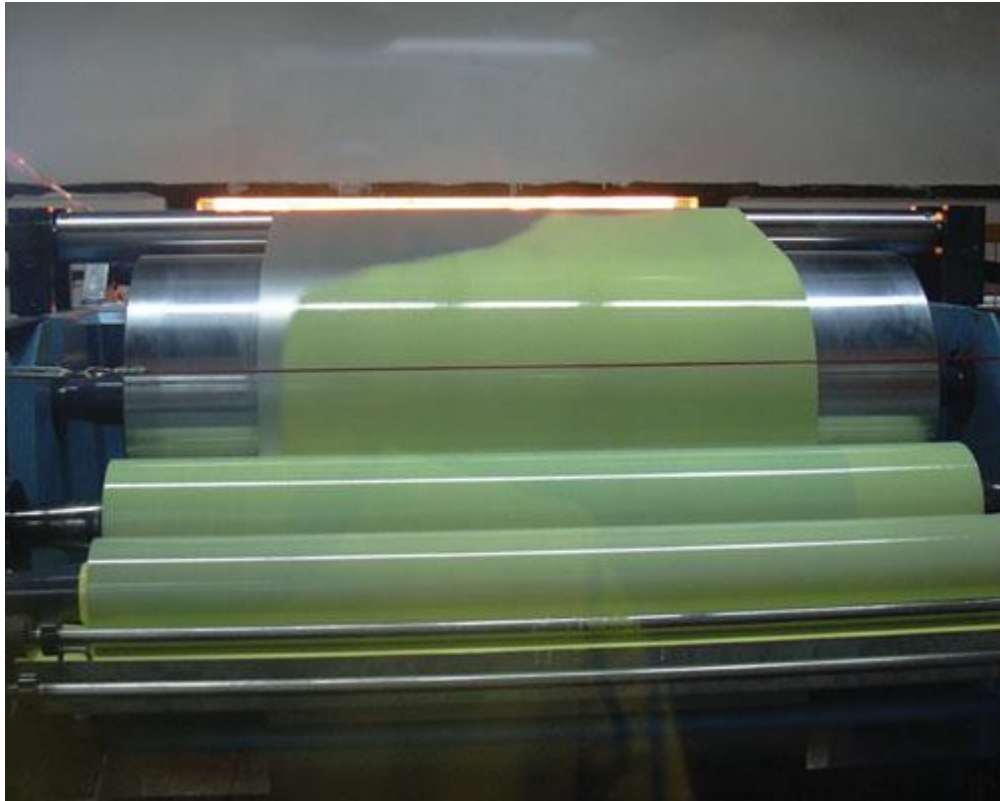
A roll-to-roll coating machine is shown. This machine is used to apply paint to aluminum and steel coils. This image is taken from the website of the company that produces the machine, <http://www.ttnet.net/ttnet/gotopr/MN560/050/0/251303034373138373.htm>.
